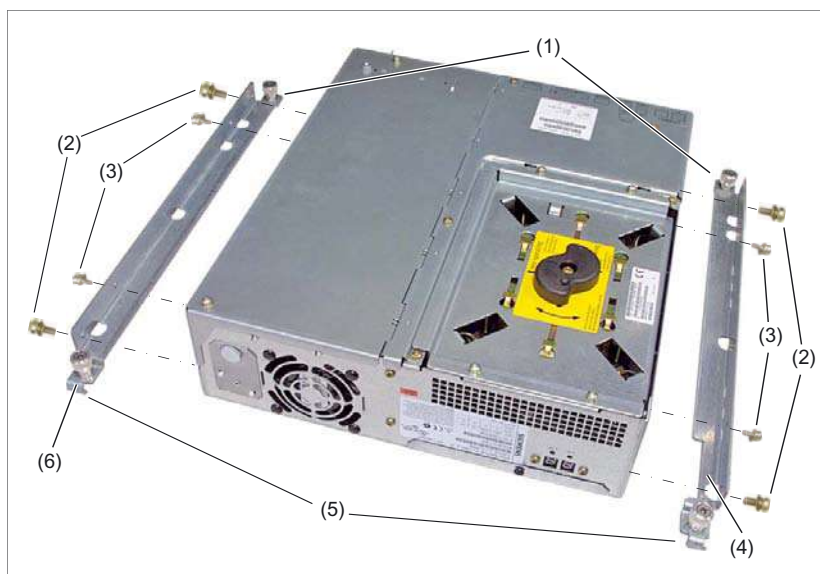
PCU 50.3 with mounting brackets (standard mounting)
